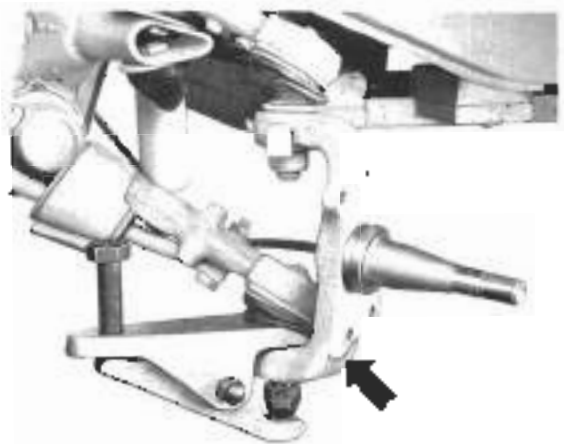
Ball joint being pressed loose in steering knuckle assembly.
